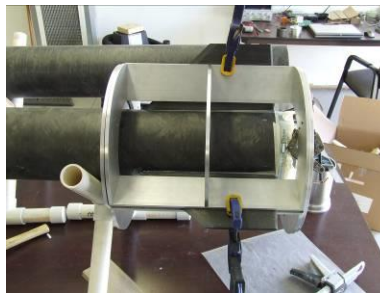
The fin fixture was used to position the fins while adhesive cured.
